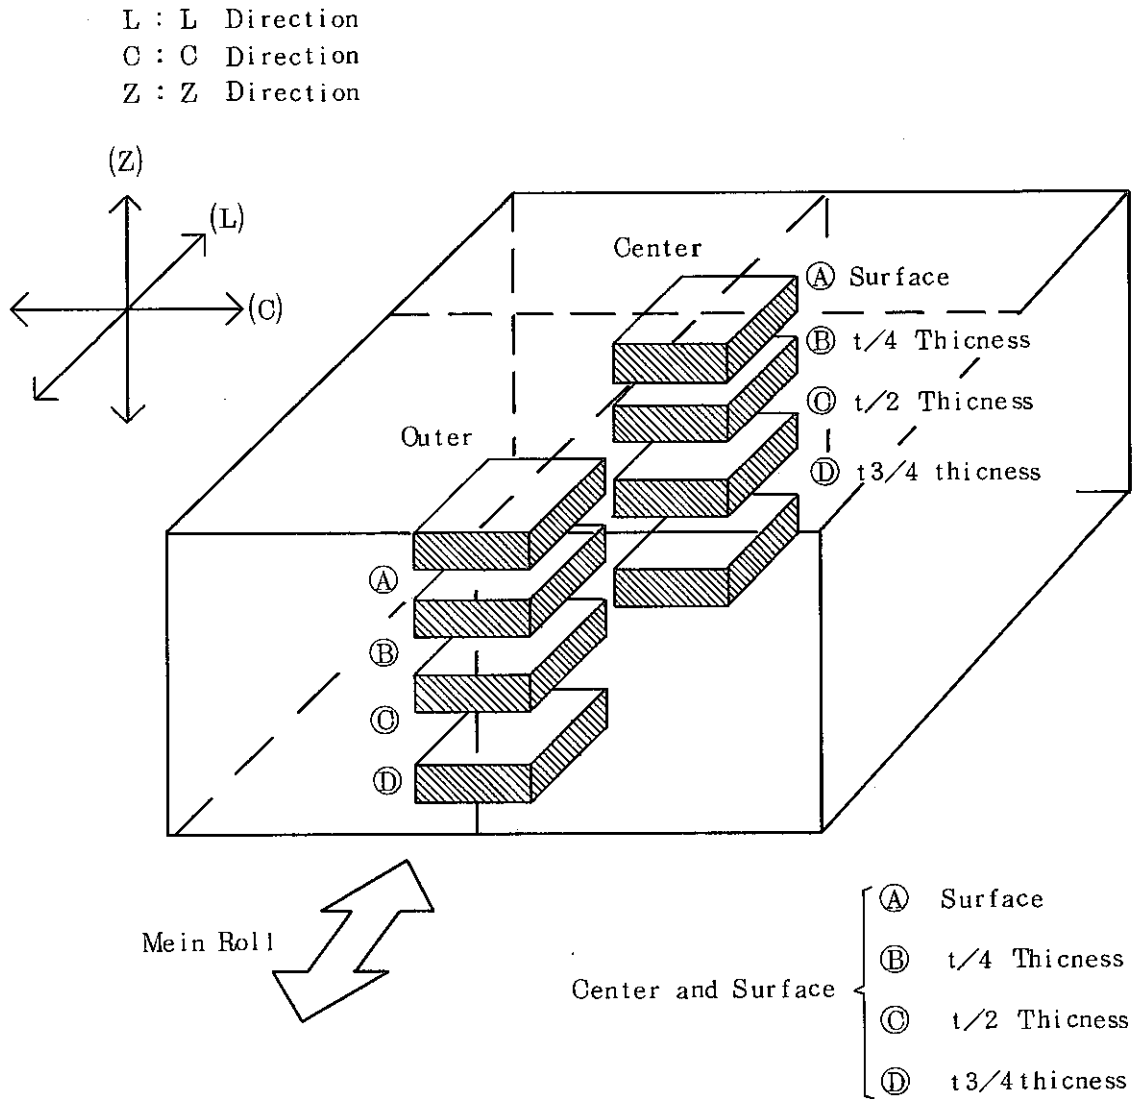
Sampling Method of Tensile Specimens of 9Cr-Mo Steel Forging.
